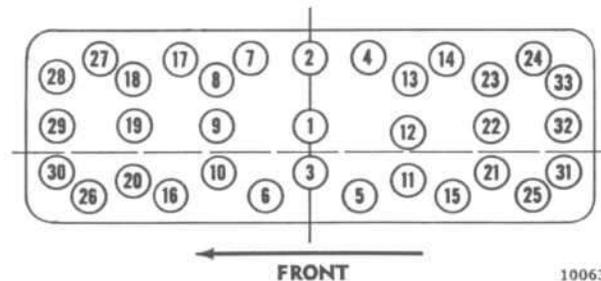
CYLINDER HEAD BOLT TIGHTENING SEQUENCE
